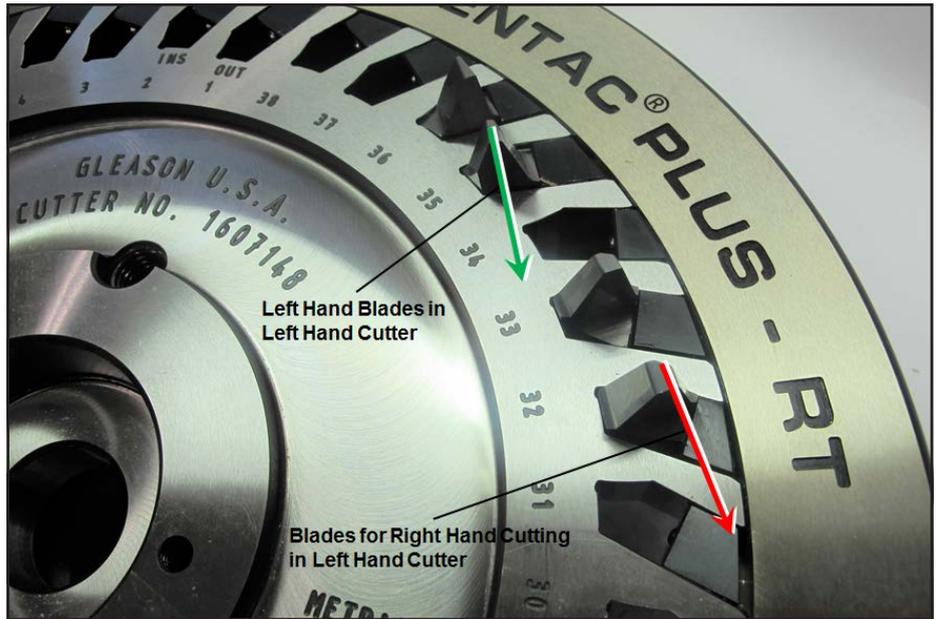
Standard blades for LH cutter and special blades for RH gear.
